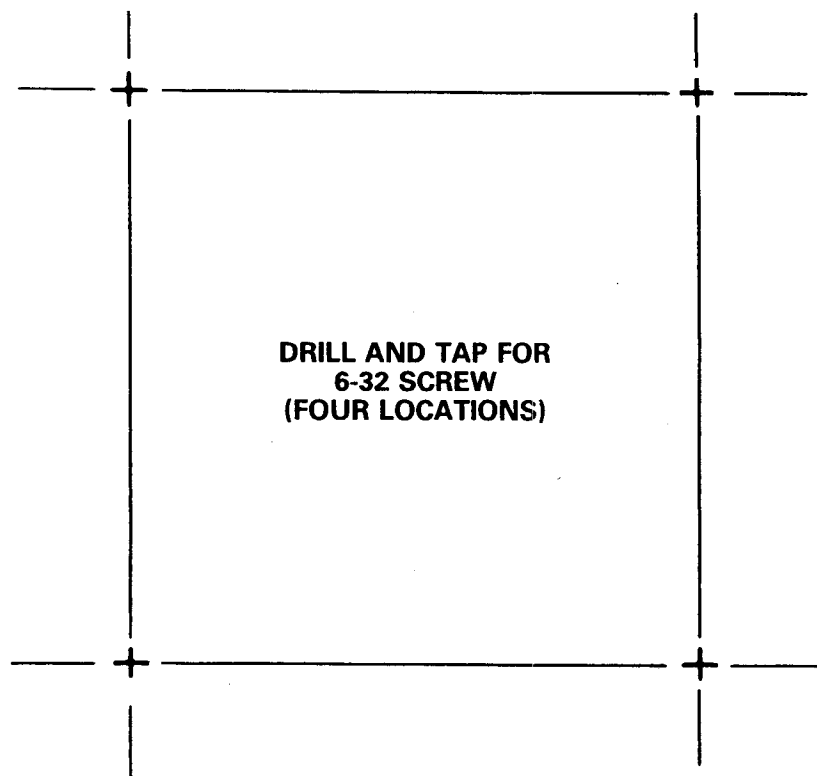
Interface Boards Surface Mount Drill Template
